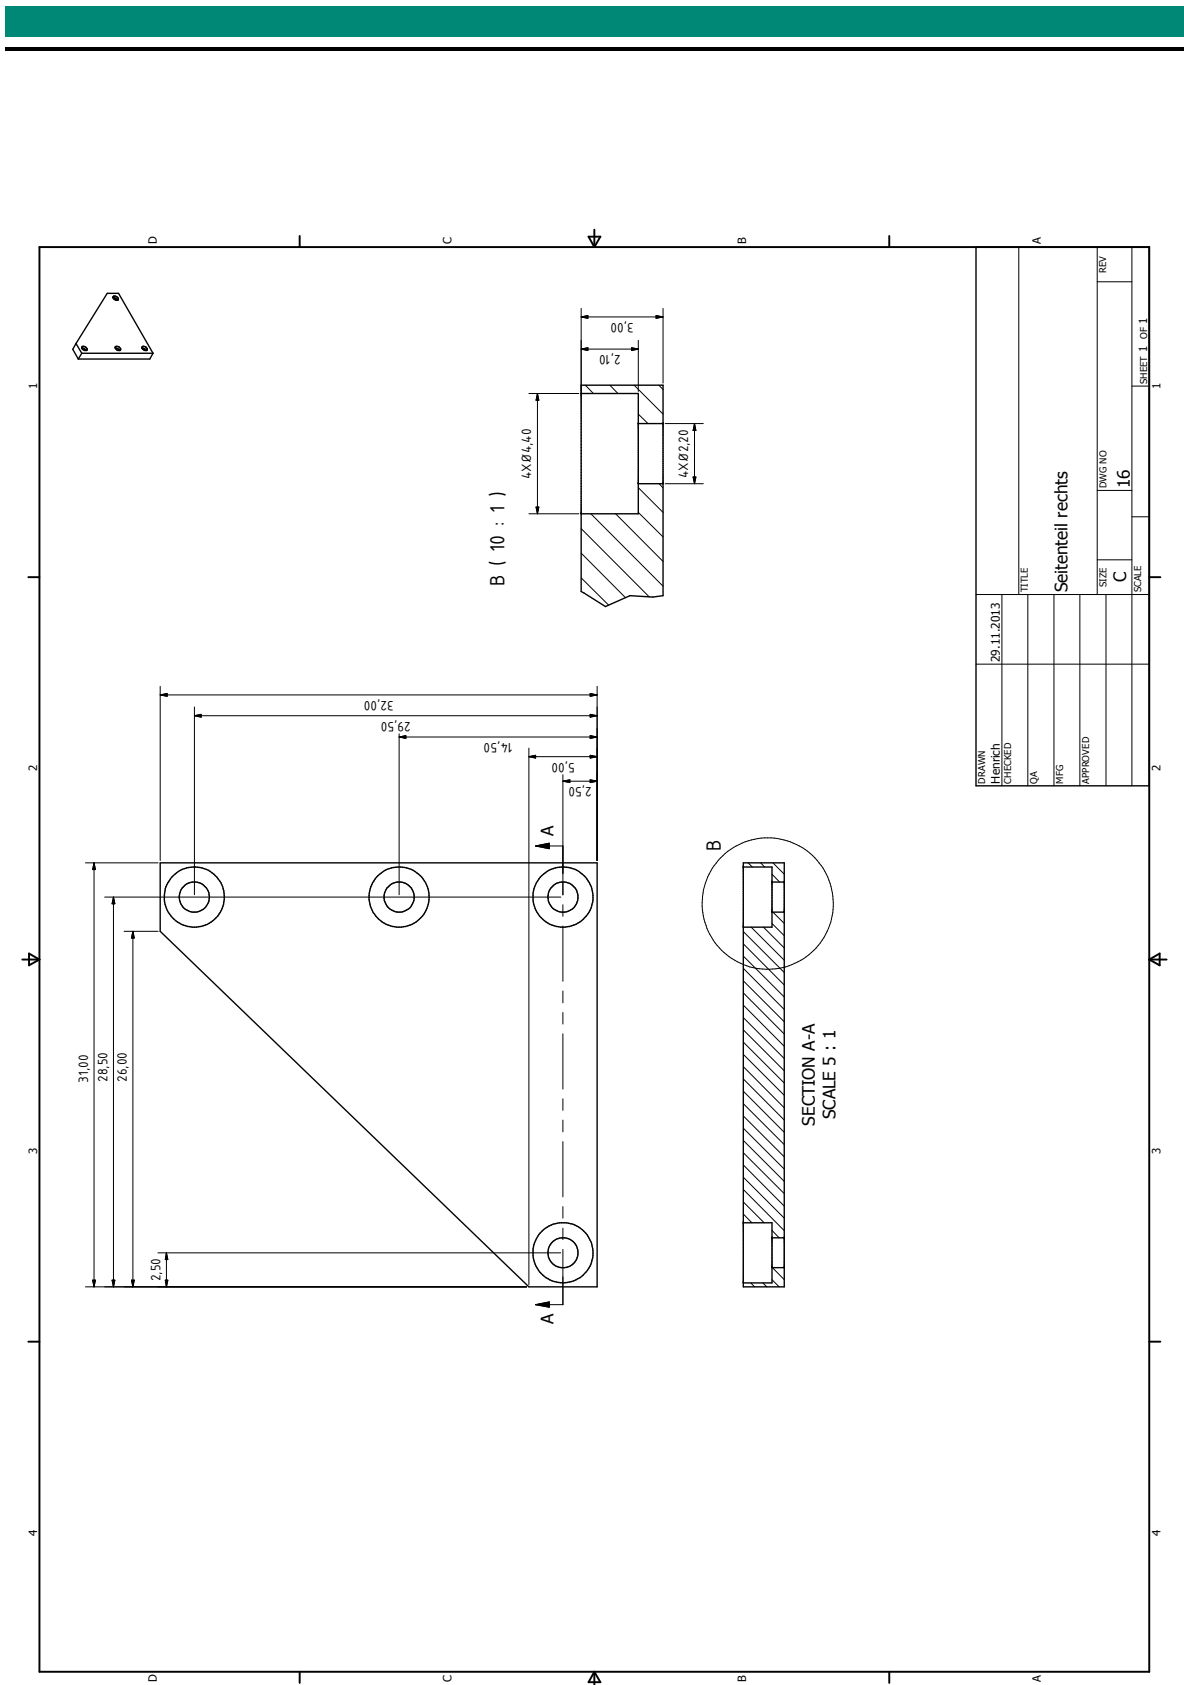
Technical drawing of the right side plate of the glass slide extension.
